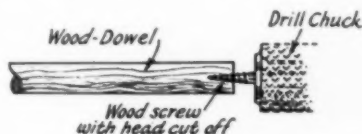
DOWEL MOUNTED ON A WOOD-SCREW HELD IN A DRILL CHUCK READY FOR WINDING
